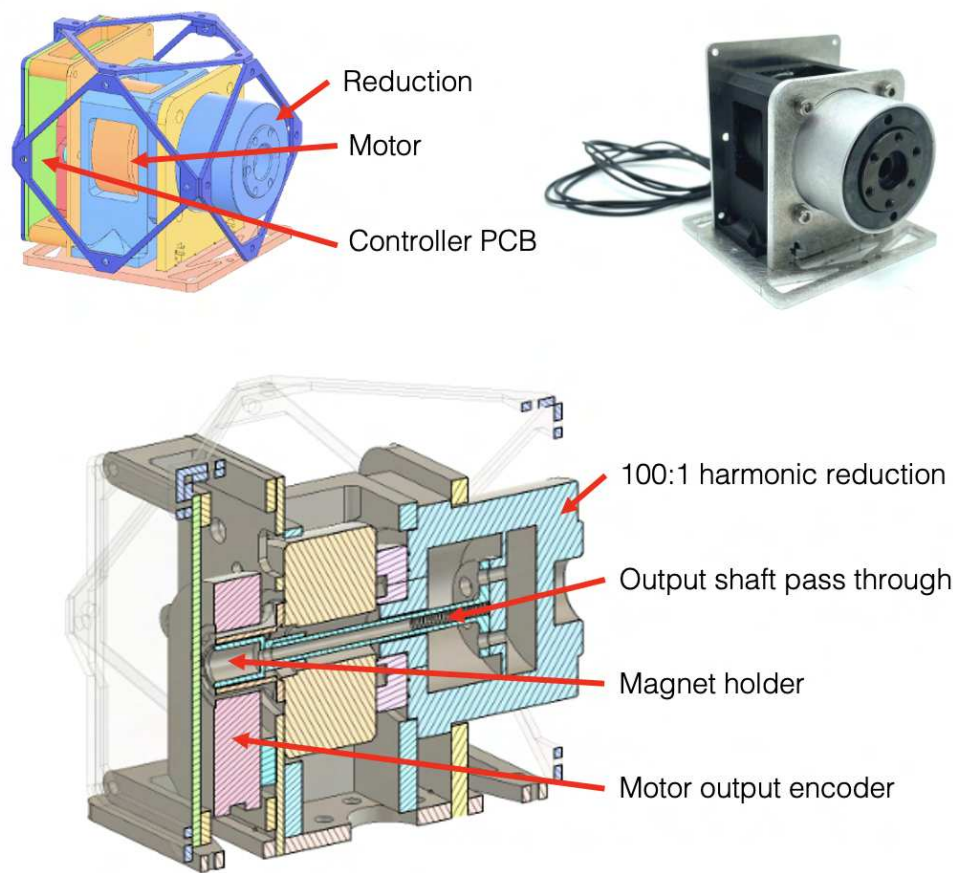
The motor module in the MILAbot v2. The lower image shows a cutaway view of the module model to show the feedback pass-through mechanism.
